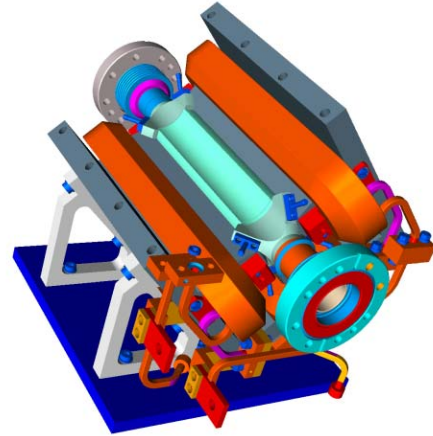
Drawing of a TTF2 stripline installed inside a quadrupole magnet.
